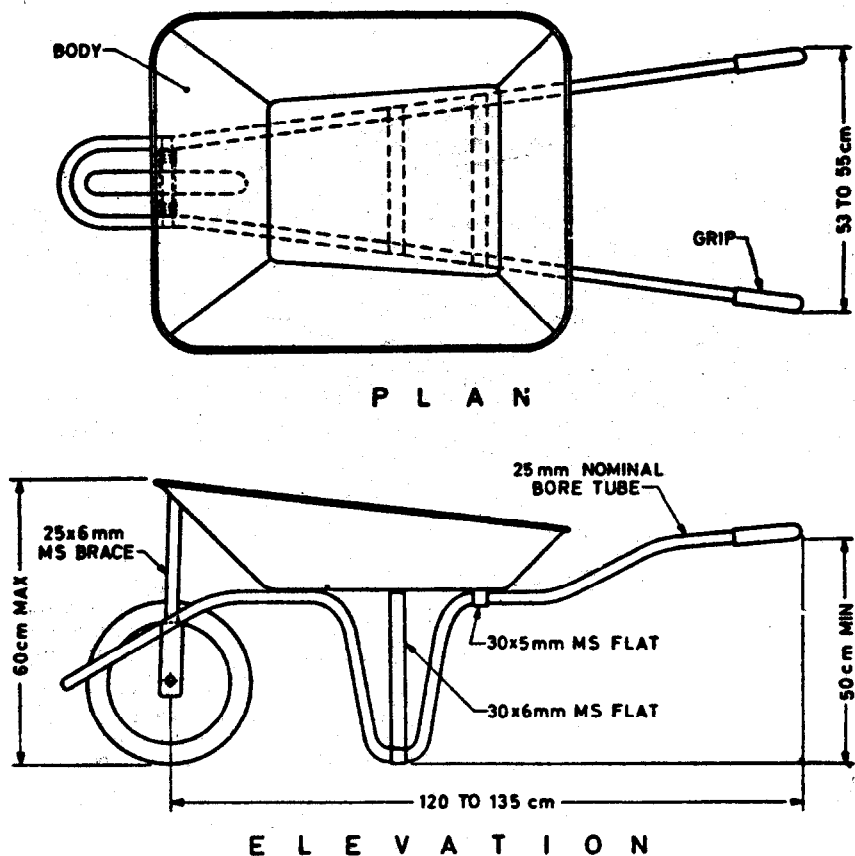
TYPICAL SKETCH OF WHEELBARROW (SINGLE-WHEEL TYPE)
